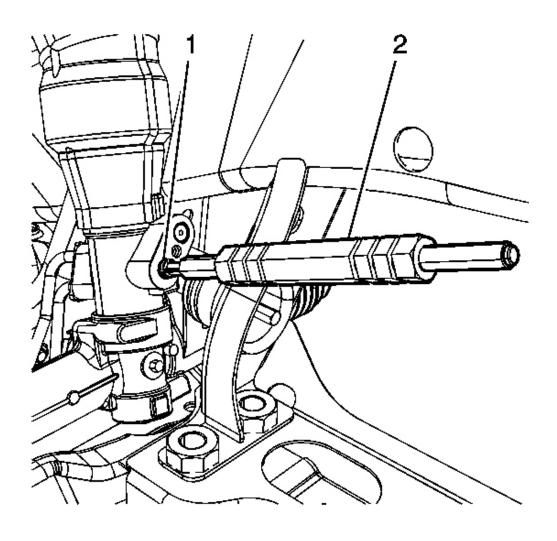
Installing Seal Extractor J 44586 Courtesy of GENERAL MOTORS CORP.
